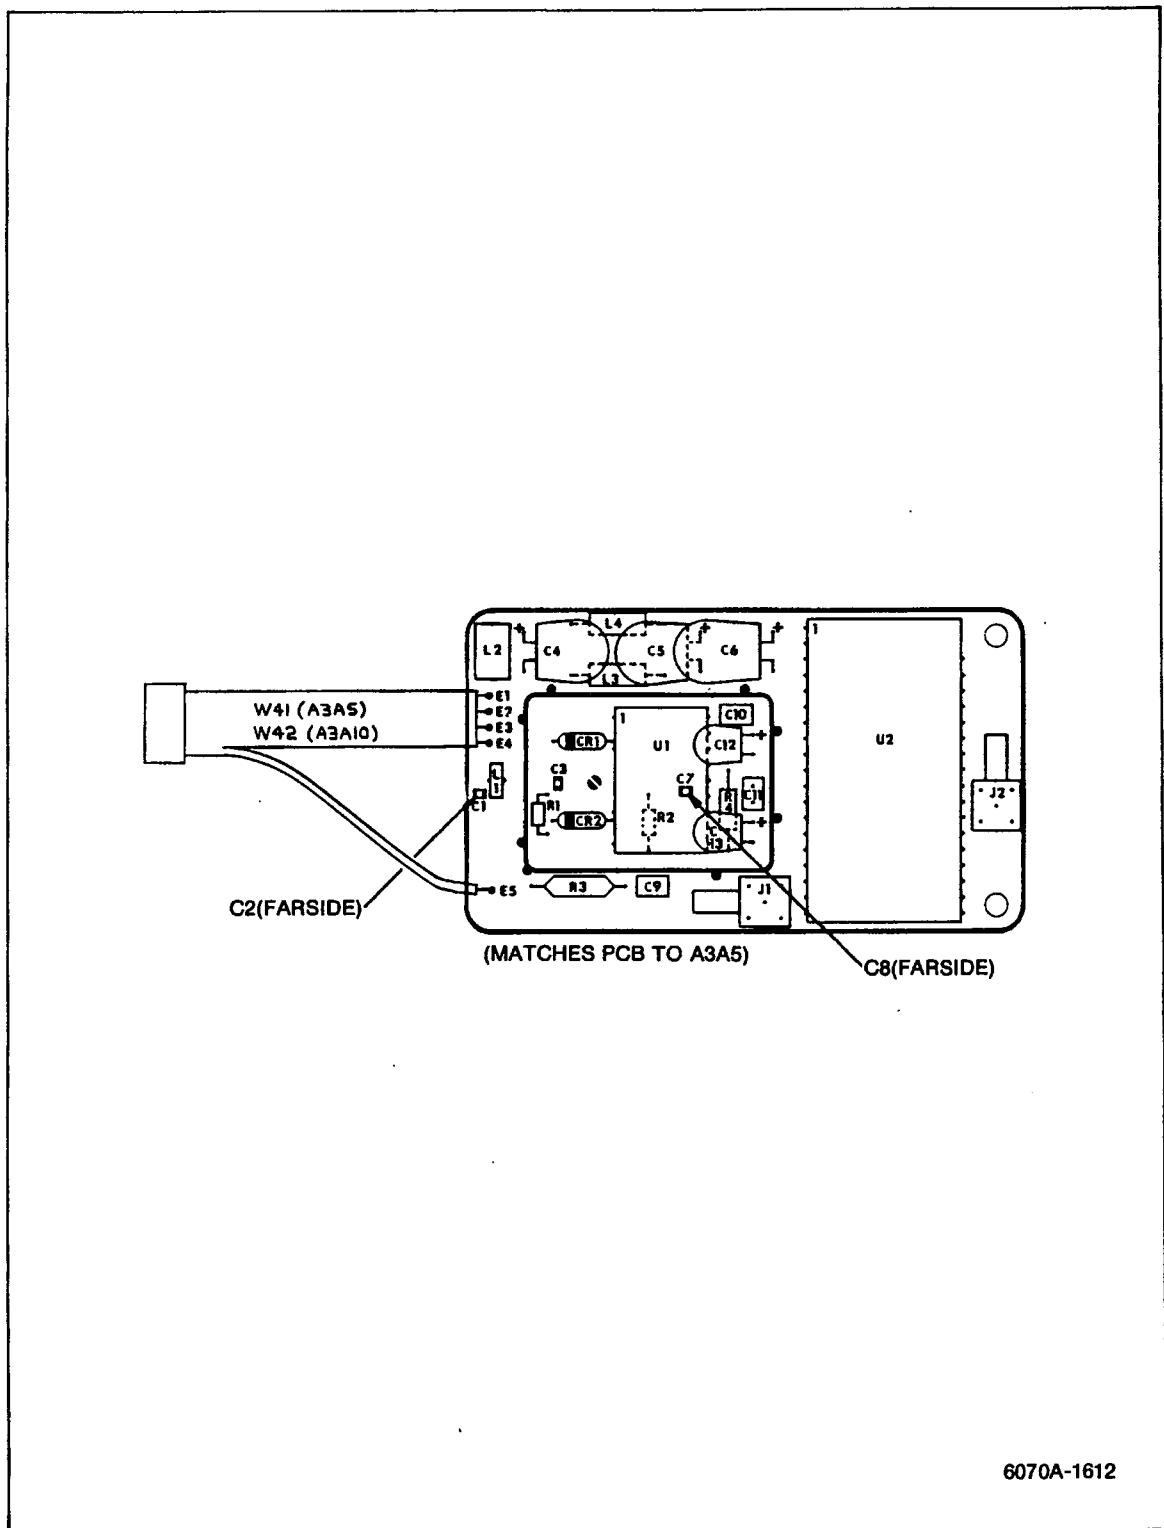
A3A10 VCO Resonator PCB Assembly
